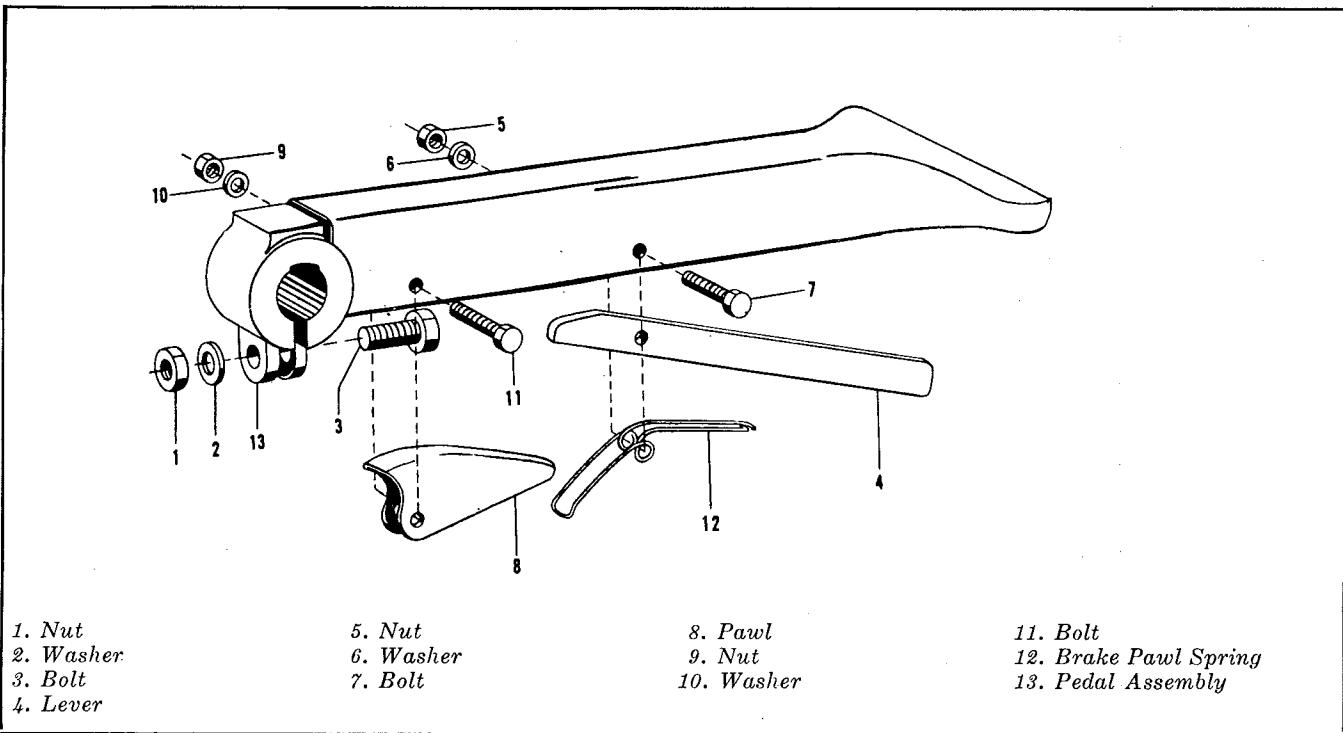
Brake Pedal Assembly, Part No. S101694
